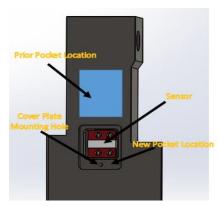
Bottom view of a CAD model showing change in sensor and cavity location.
